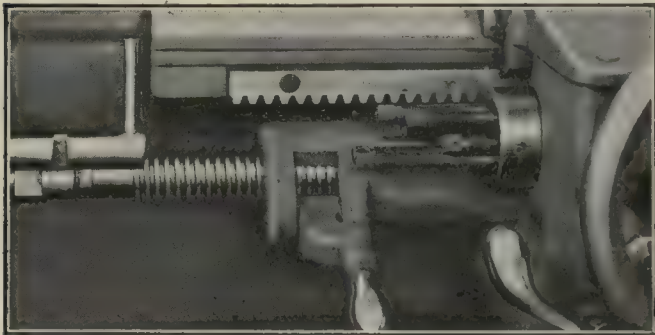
VIEW SHOWING SCREW-CUTTING ATTACHMENT AND CARRIAGE STOPS
